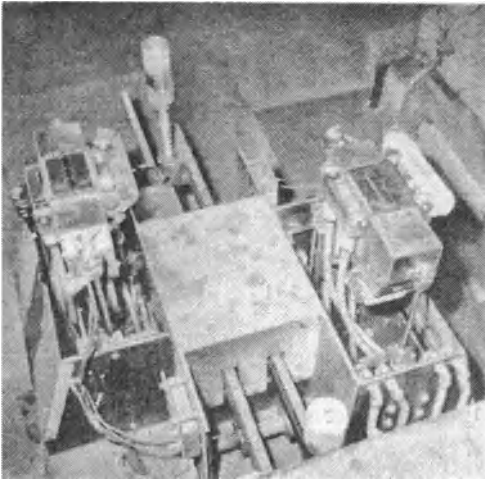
Probe assembly of the installation shown in Fig. 24.17
